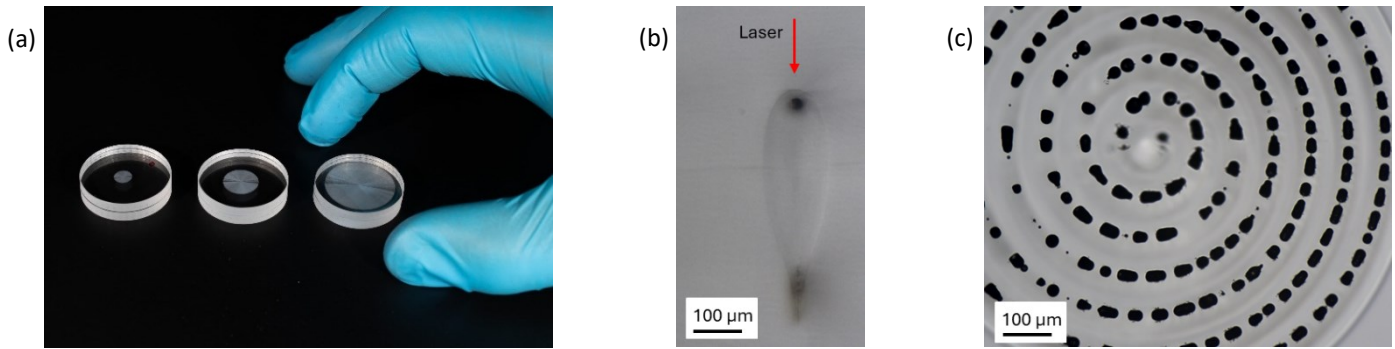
(a) Fused silica samples (3 mm thick) laser-welded using spiral patterns with different diameters; (b) Side-view microscope image of a laser-induced modification at the interface of two fused silica samples; (c) Top-view microscope image of the welded sample
